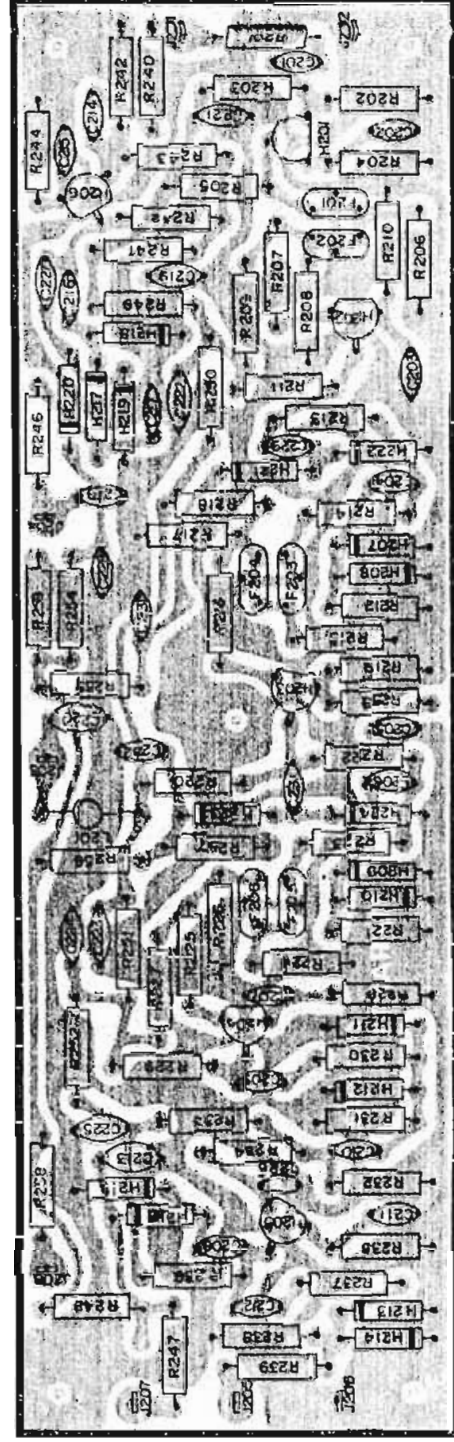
FM IF Amplifier Assembly P200 Component Locations
